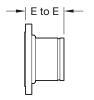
FABRICATED FLANGE ADAPTER ANSI CLASS 150 LBS. GROOVED
